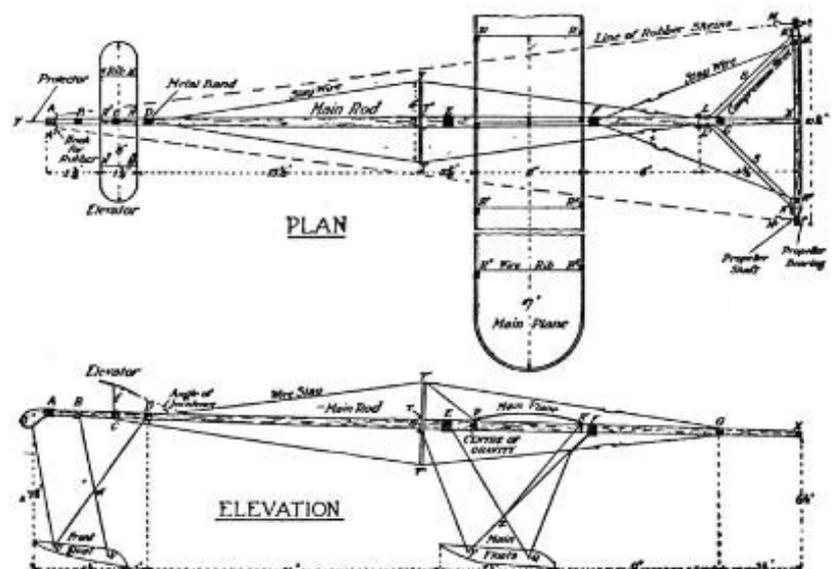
Plan and side elevation of Hydro-Aeroplane (one-eighth full size).
